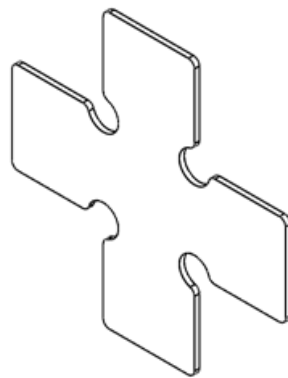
Cruciform shaped specimen for biaxial tensile testing –[11]
